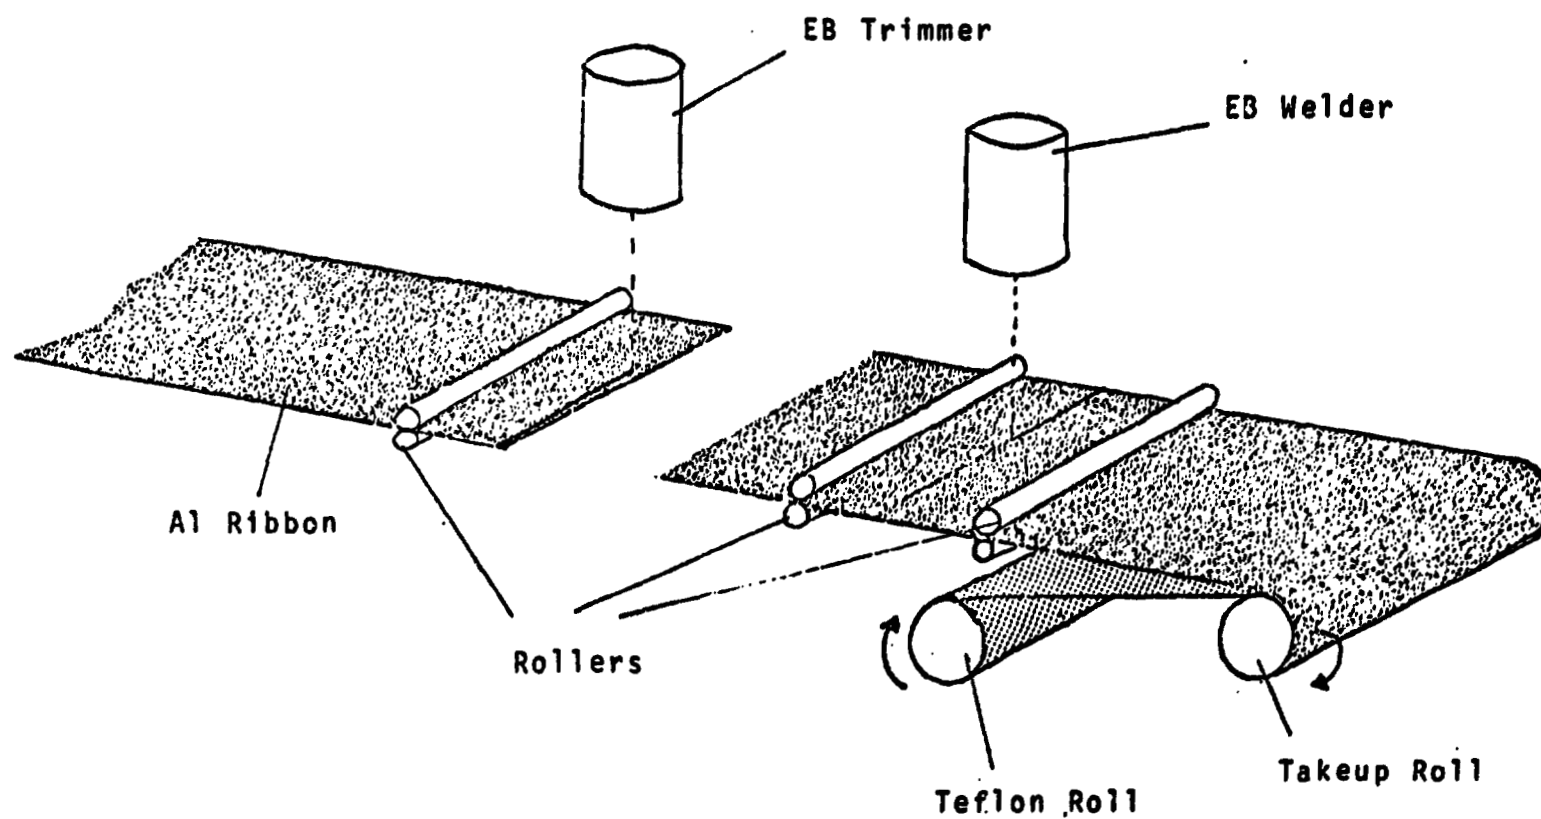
END TRIM, WELD, AND ROLL WINDER
